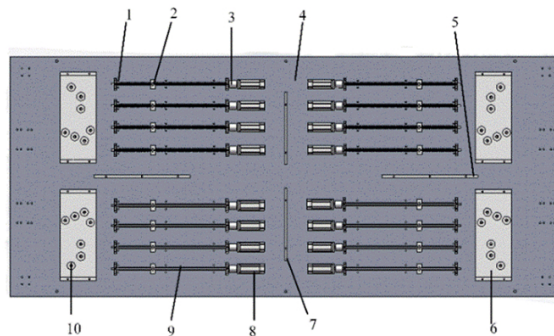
Overall structure of chassis: 1 – bearing piece; 2 – slider; 3 – coupling; 4 – chassis; 5 – support plate (long); 6 – steering wheel pillar t bench; 7 – support plate (short); 8 – servo single machine; 9 – ball screw; 10 – steering wheel
